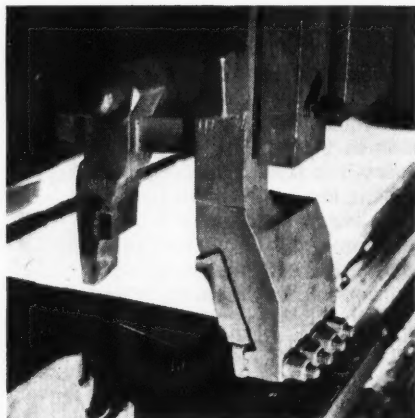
Double tool setup for remachining angle bars. With these tools 104 hard steel angle bars have been remachined in eight hours.
